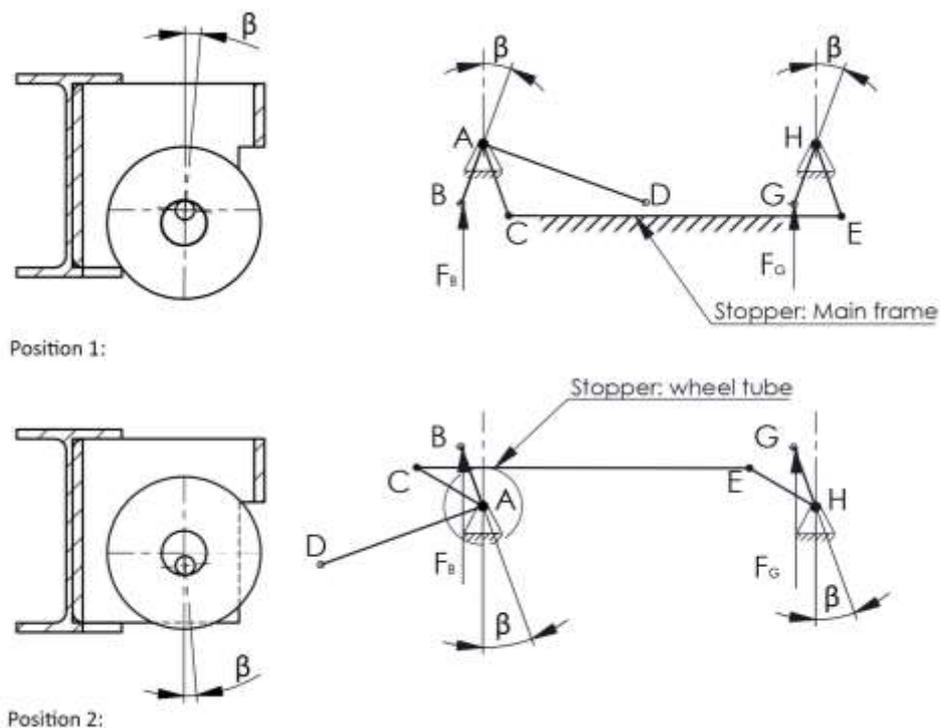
Wheel locking mechanism; Position 1: Wheel is lowered to floor; Position 2: wheel is lifted up
